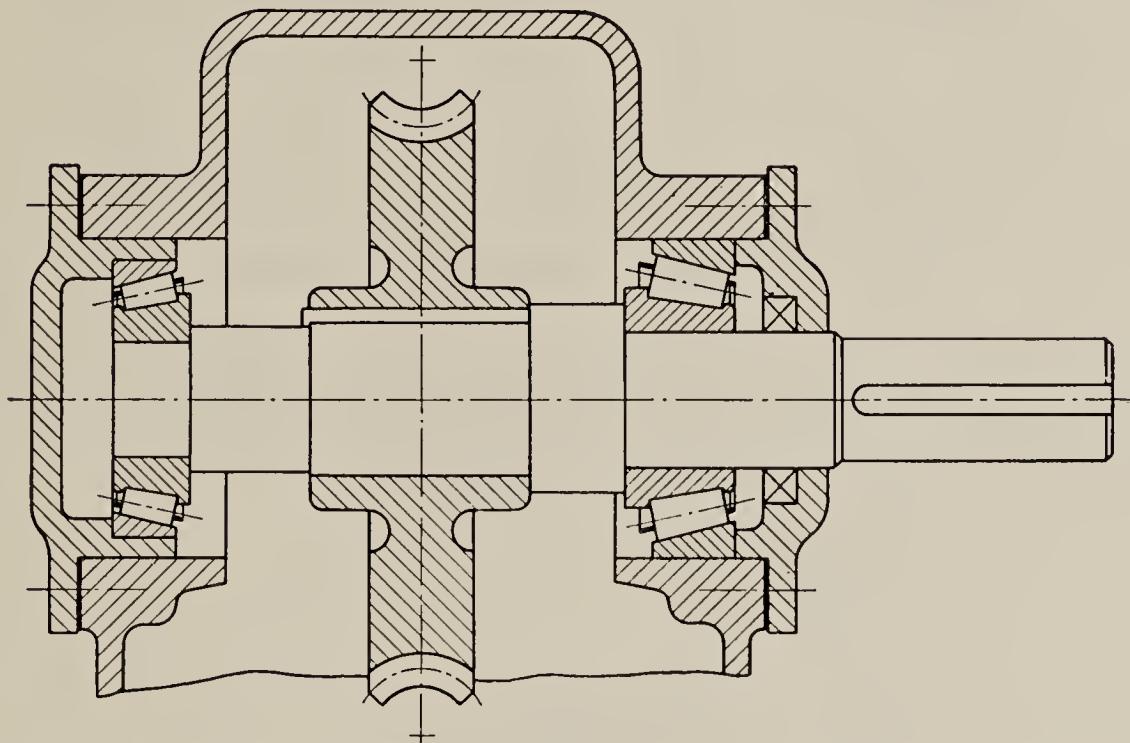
Worm-gear shaft mounted on Timken tapered-roller bearings.
